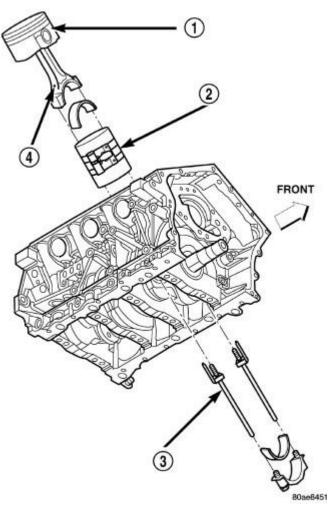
Piston & Connecting Rod Courtesy of CHRYSLER LLC
